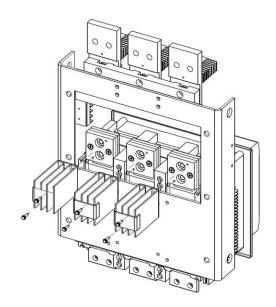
1200A-1600A BOTTOM FEED SWITCH
